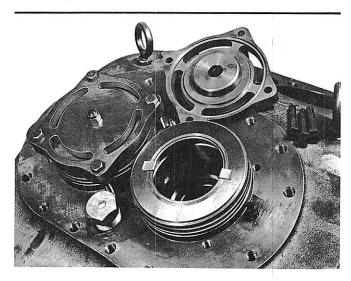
SUCTION AND DISCHARGE VALVE ASSEMBLIES (NEW DESIGN)
